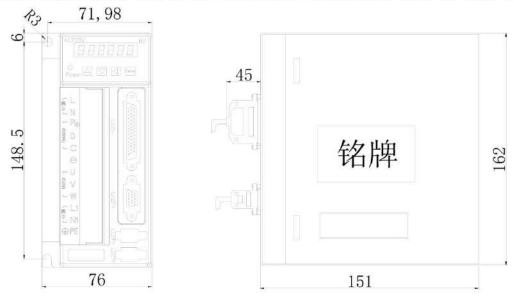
Front figure of DZ-15B2 series installation dimension Side figure of DZ-20B2, DZ-30B2 series installation dimension, as shown in fig. 3-2.
